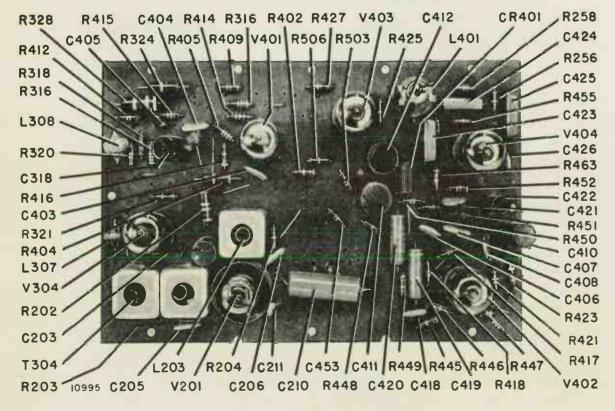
View of Component Side of Printed Wiring Board A5780-4 Used in 16U1C, 16W1C, and 16AW1C Chassis.
